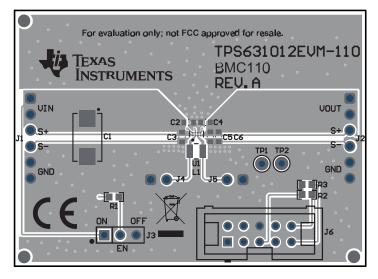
TPS631012/3EVM PCB - Top Layer
